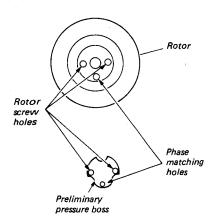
Phase matching between rotor and preliminary pressure boss
